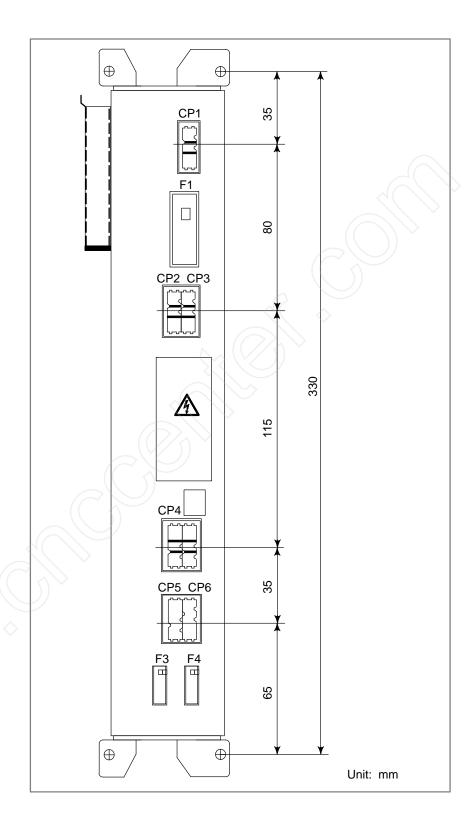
(b) Cable lead-in diagram (Type-B axis card, power supply unit AI for CE marking is mounting)
